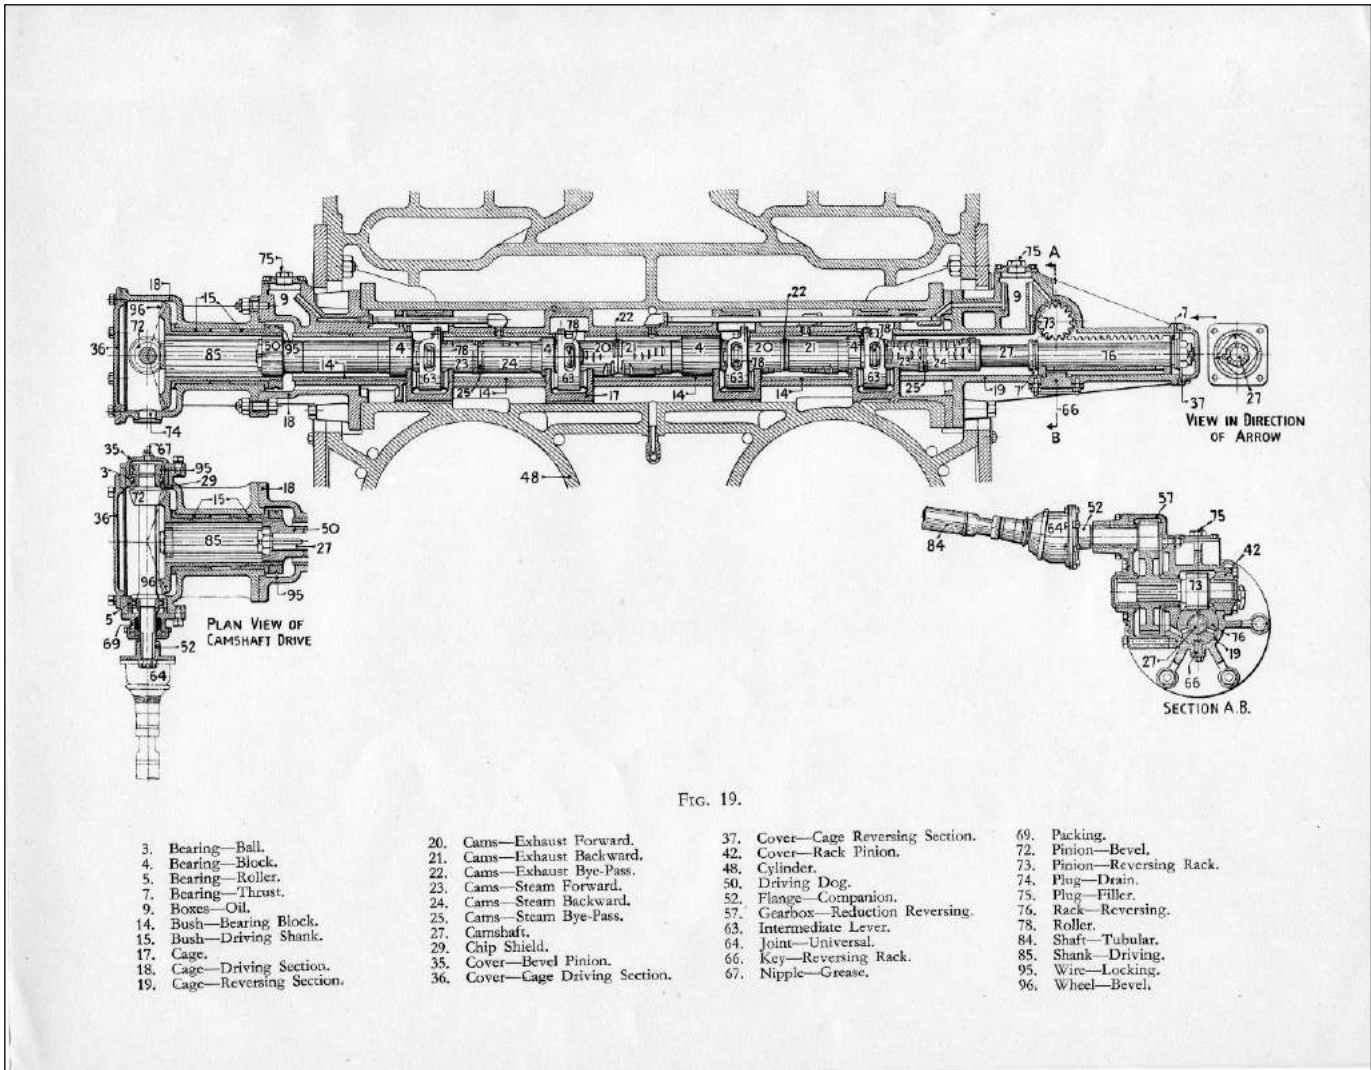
RC Gear section through cam shaft for 2 inside cylinder locomotive
